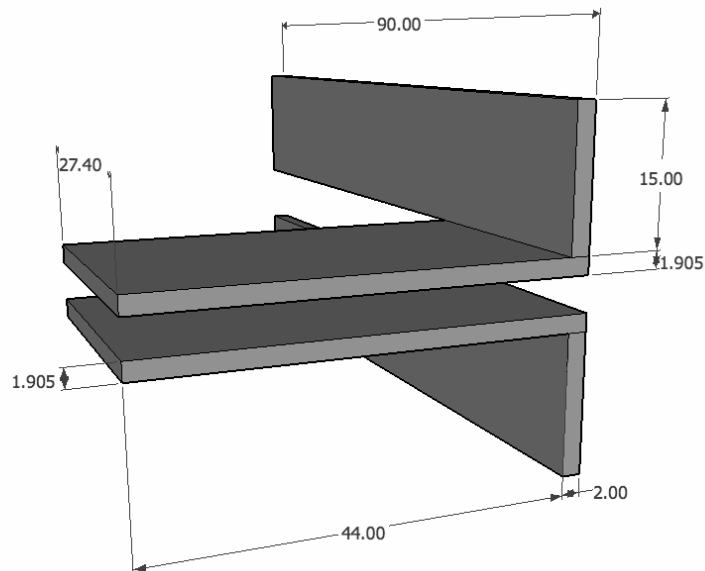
Dimensions of tungsten shields. All dimensions are in cm.
